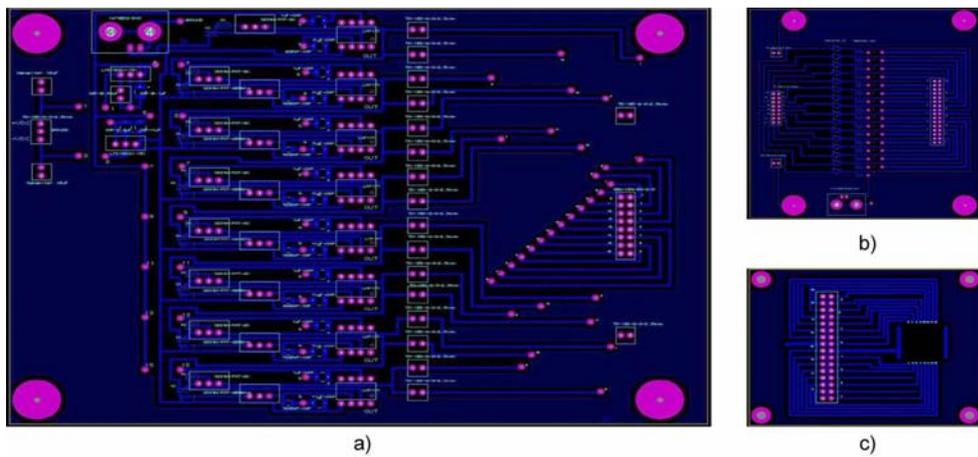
a)The layout of phase shifter circuit board, b)The layout of T-bias board, c)The layout of the fanout board
